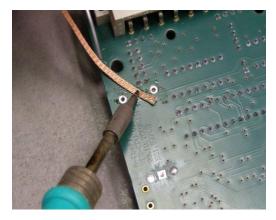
Desoldering the missing soldering pad for soldered batteries with two soldering lugs
